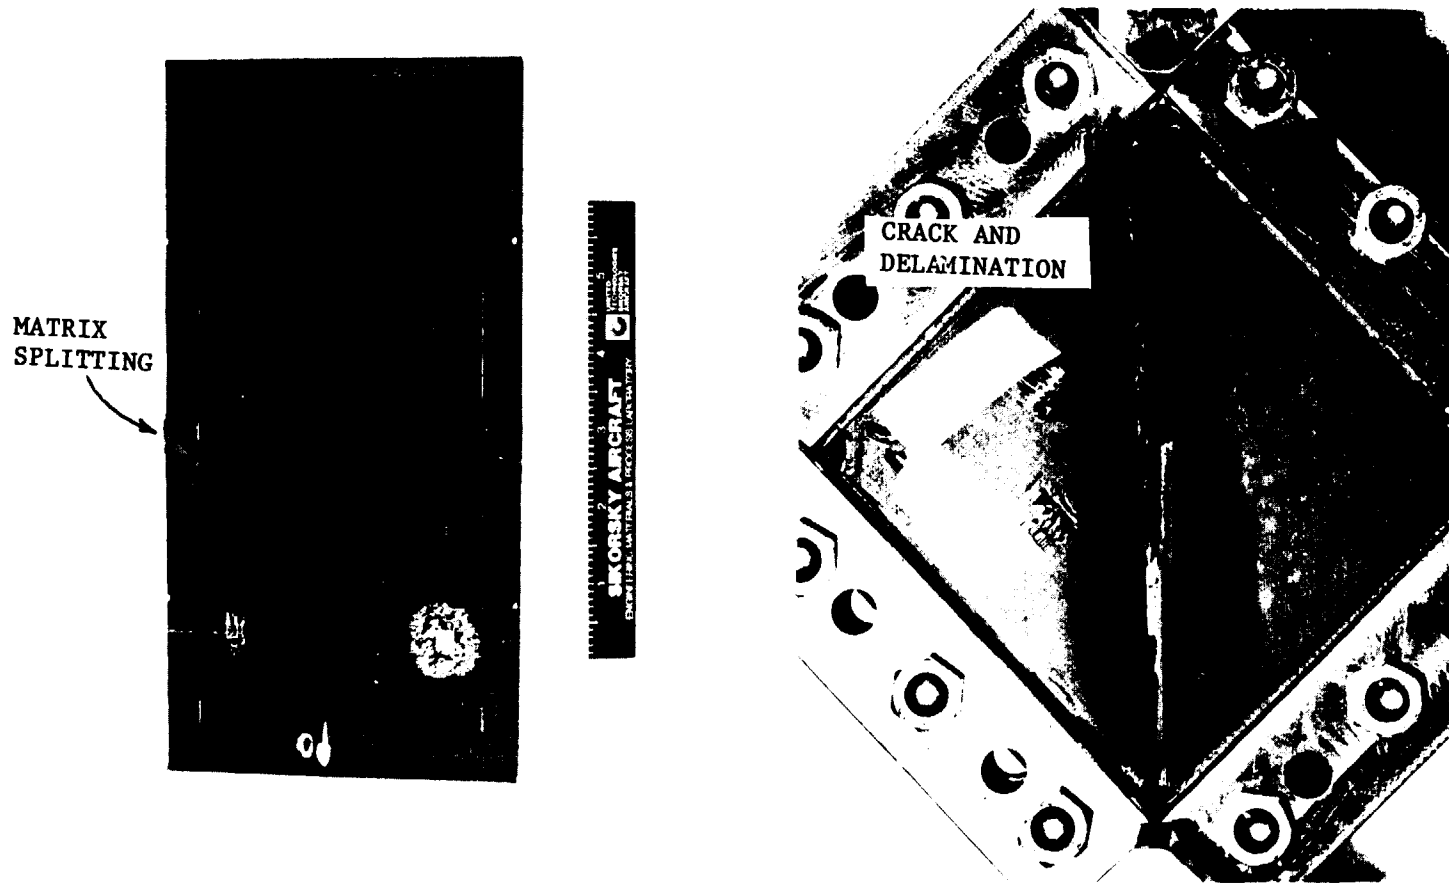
TYPICAL FAILURES OF CAI AND SAI SPECIMEN
